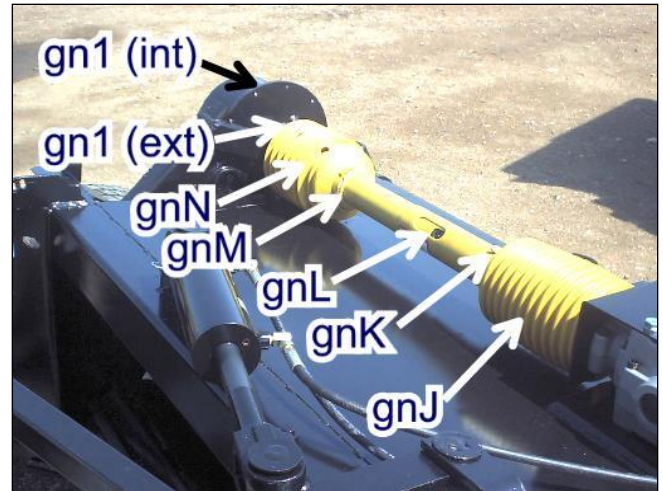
GREASE LH SHAFT –JACKSHAFT
